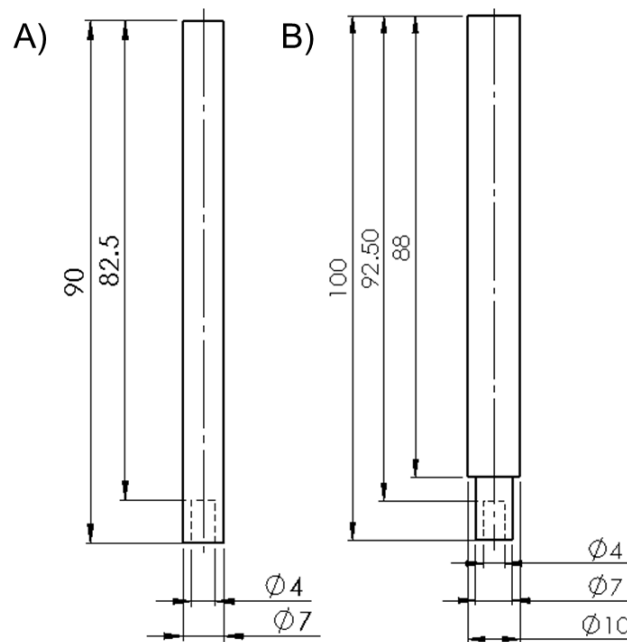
Tool material test specimens: A) M42 and MP 159 and B) Si_3N_4 .
